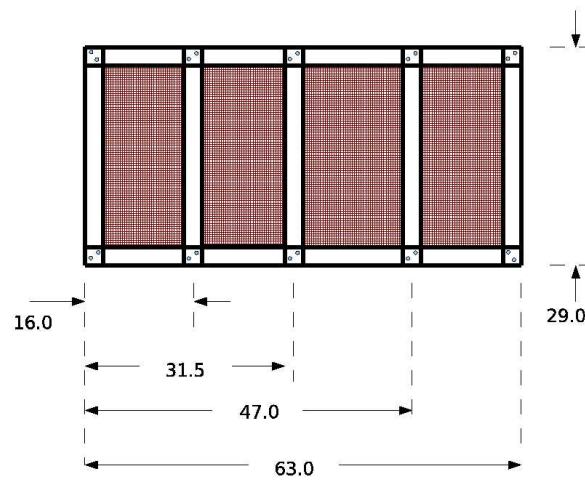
Mechanical drawing of the sides of the enclosure. Side A has all five vertical pieces while side B has only three.
